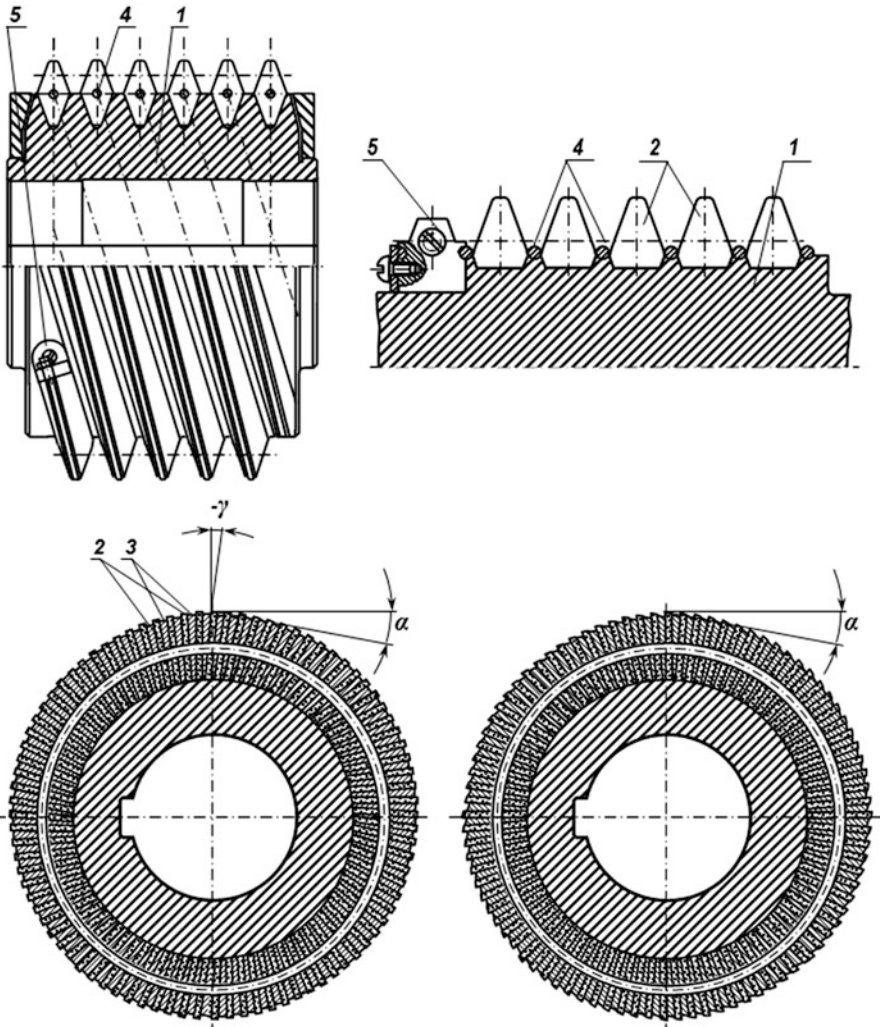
Placement of cutting plates and inserts in the hob body
